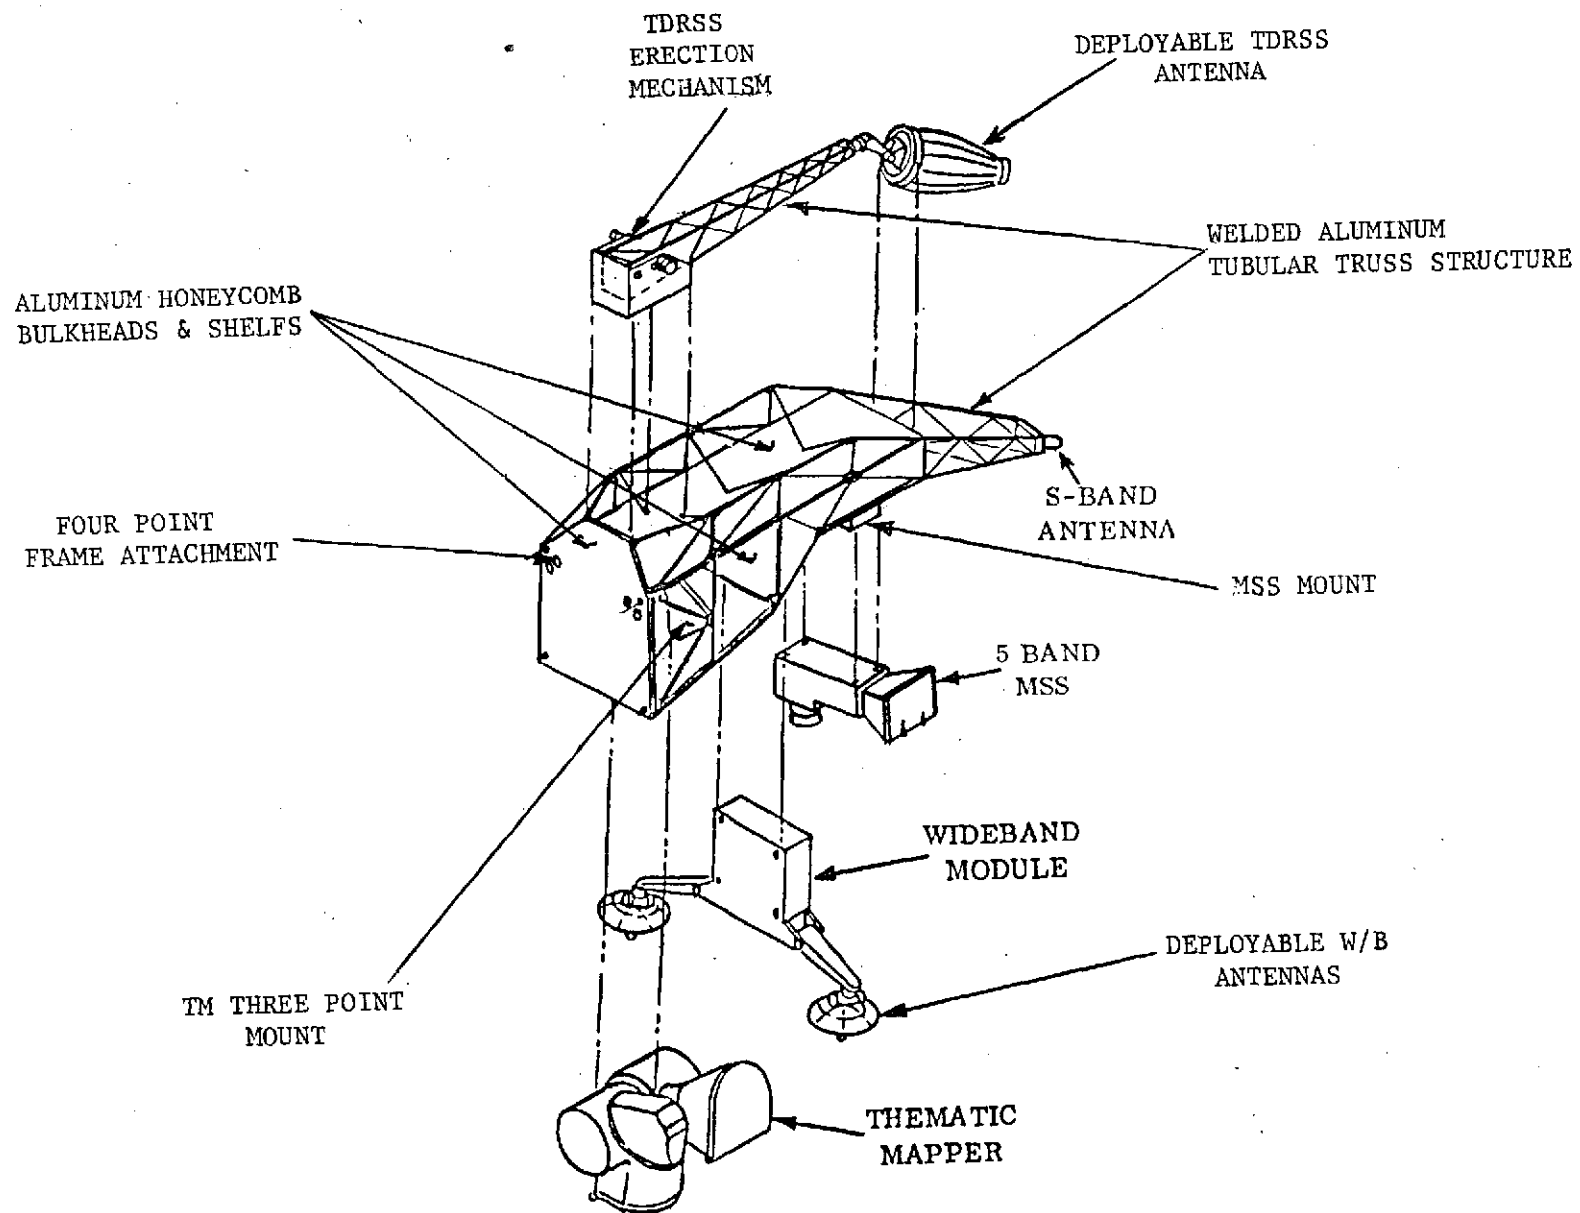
Reference Instrument Section Structural Arrangement
